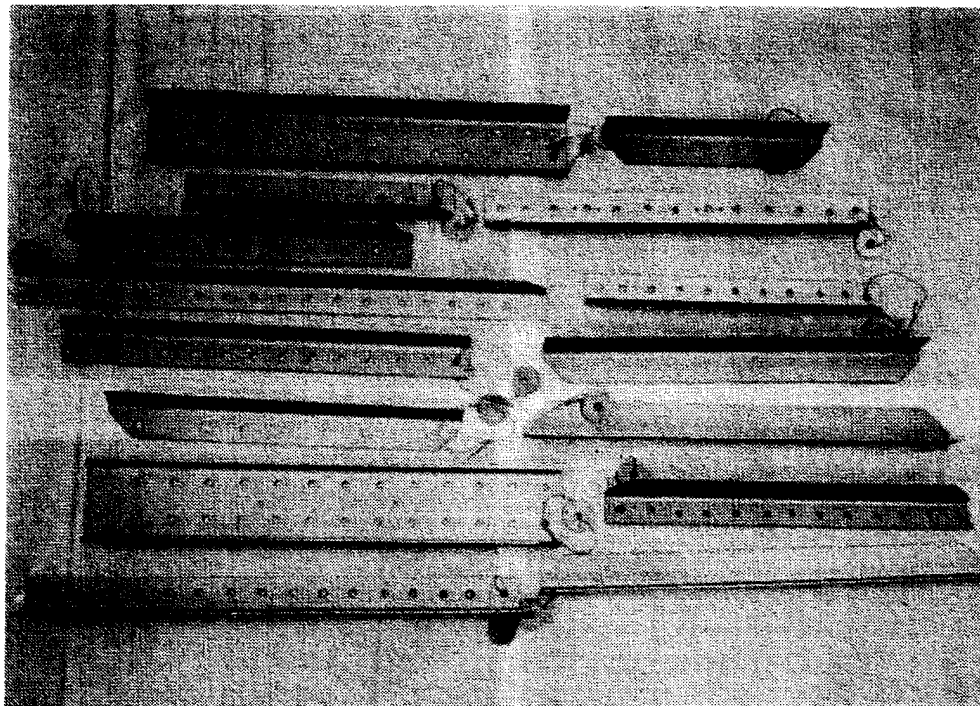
Typically Processed Warner Robins Steel Parts After IVD Aluminum, Glass-Bead Peening, and Chemical Conversion Coating.
